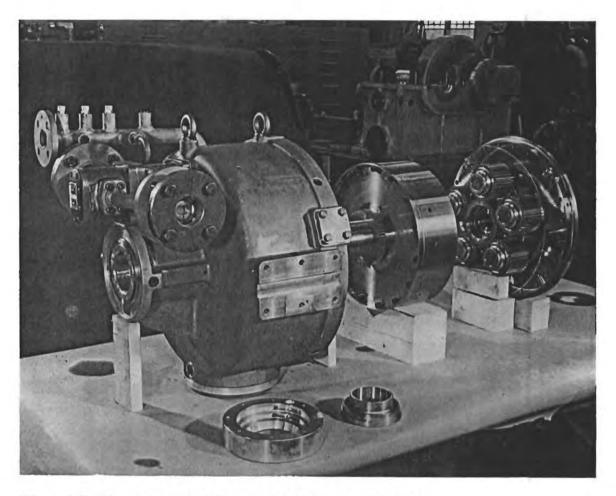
Single reduction planetary gearbox 5420 hp, 13,471/5,271 rpm.
